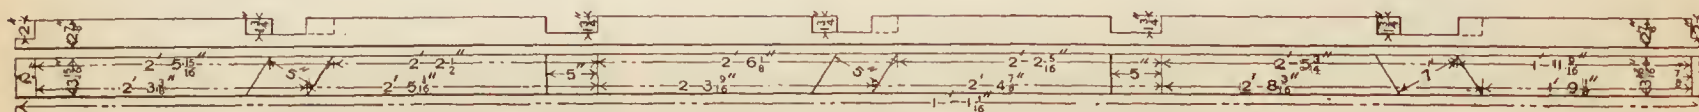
BELT-RAIL SHOWING CHECKING, GRAND TRUNK RAILWAY STANDARD BOX CAR.
